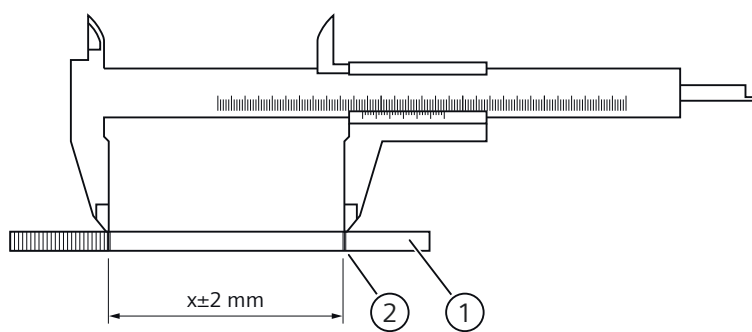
Oil level check for tandem gearbox mounting position M4
